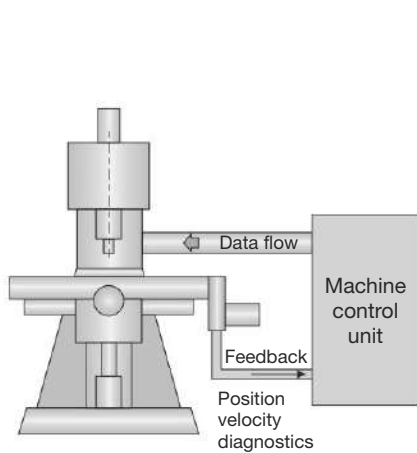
The data processing in a CNC machine tool in closed-loop control
